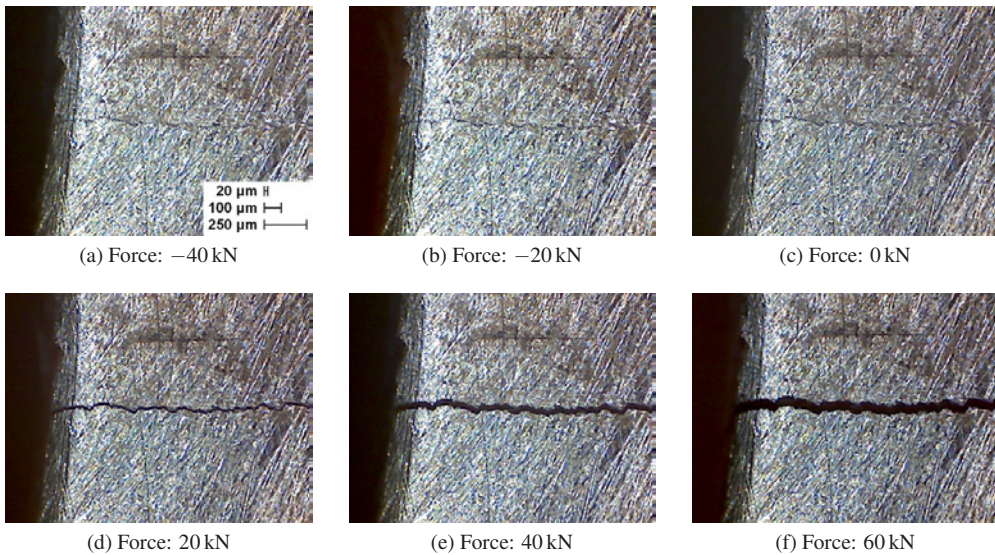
Crack mouth opening displacement at varying machine forces; specimen 10-12-I-B.
